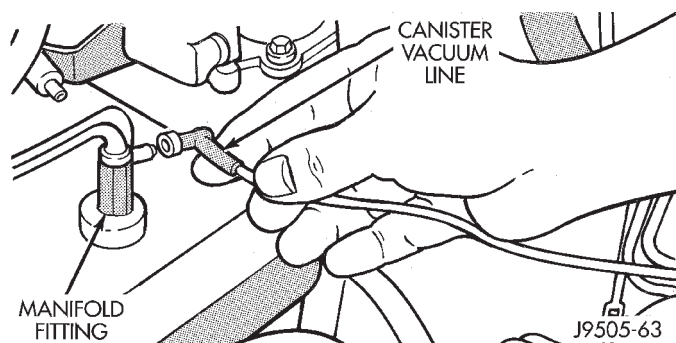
Canister Vacuum Line Location (At Manifold Fitting)
